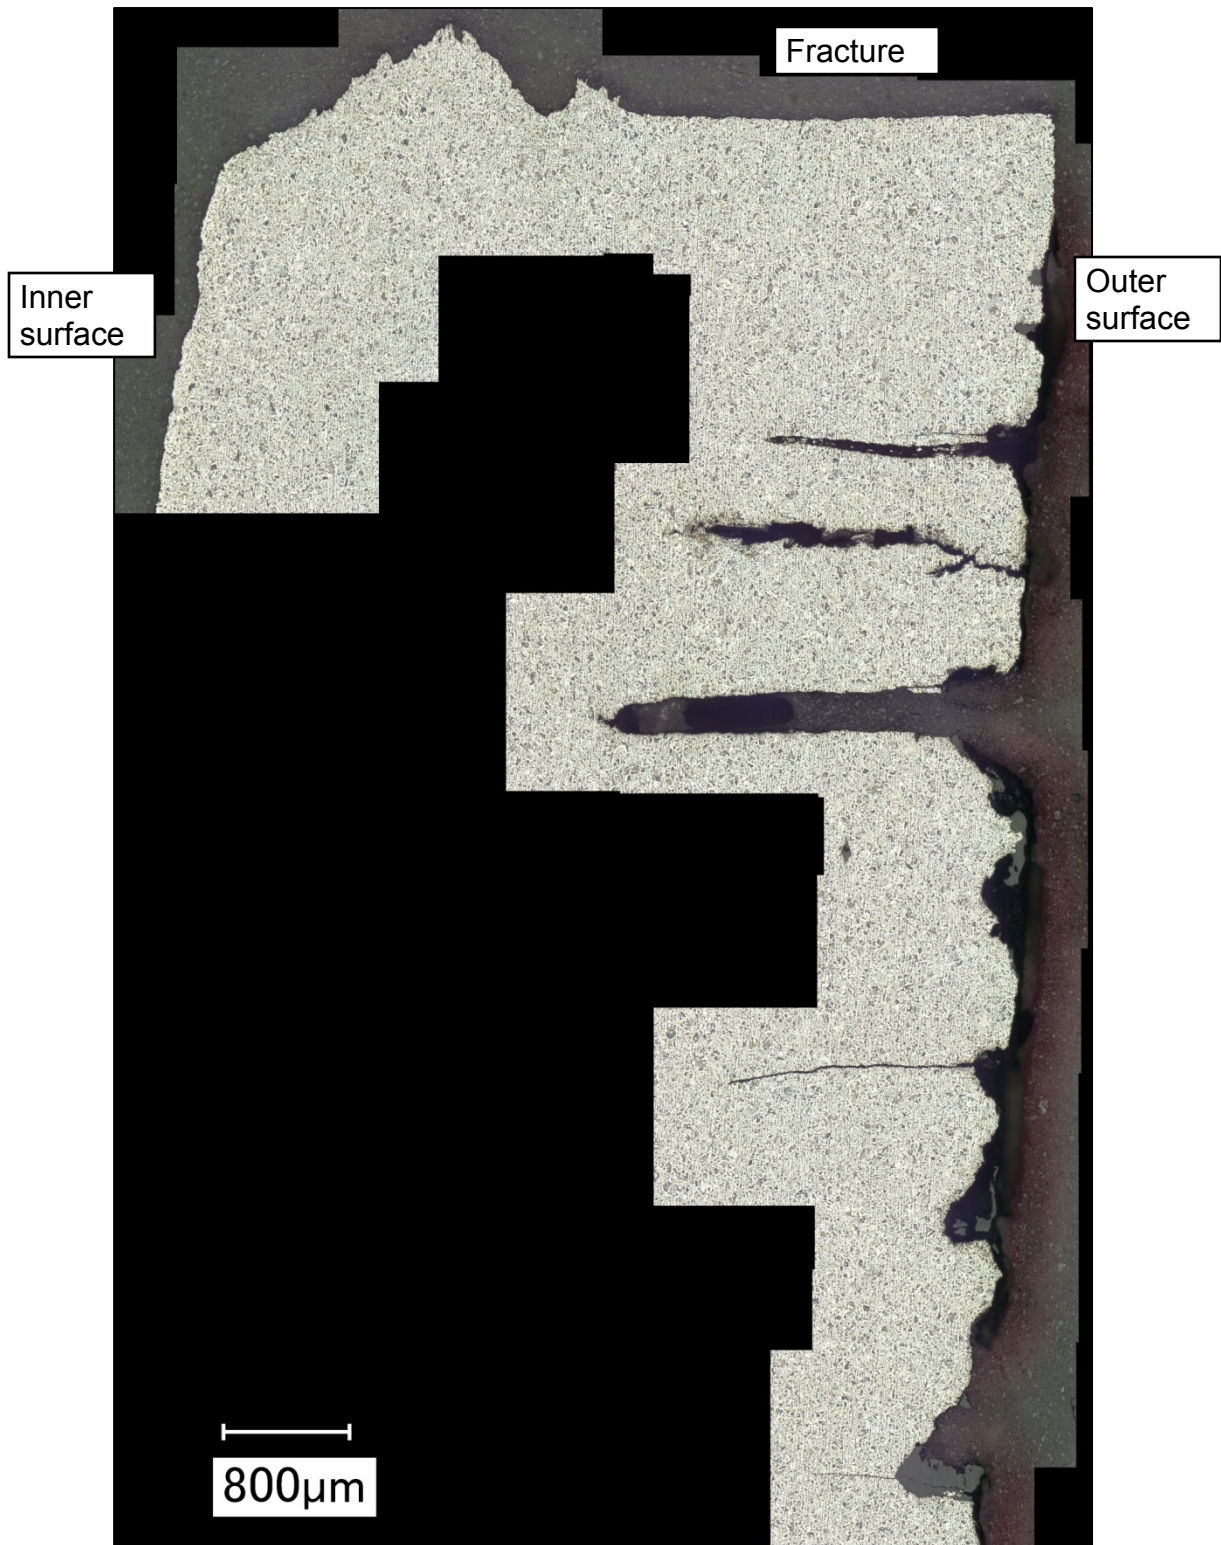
Montage of a polished and etched transverse cross-section (mount MM1) showing the fracture surface and multiple secondary cracks.
